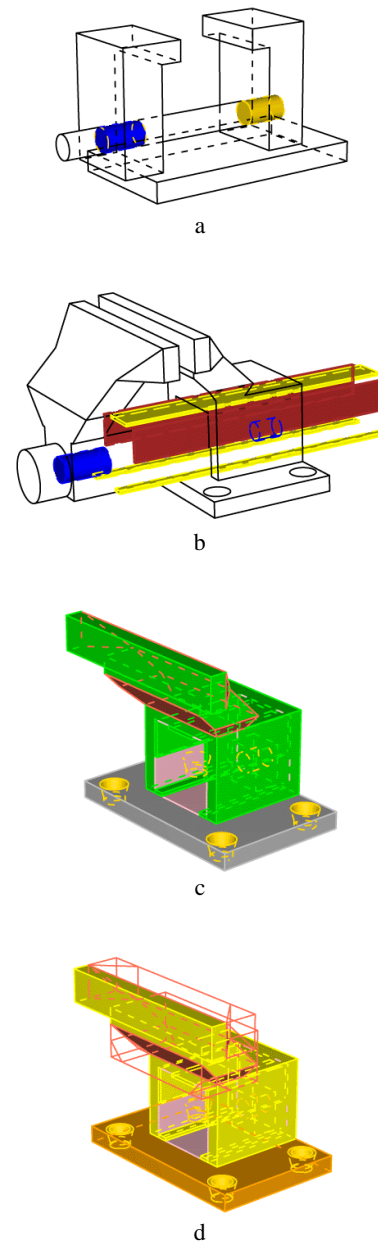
A conceptual design view (a), an assembly design view (b), a part detail design view (c), and a part manufacturing planning view (d).
